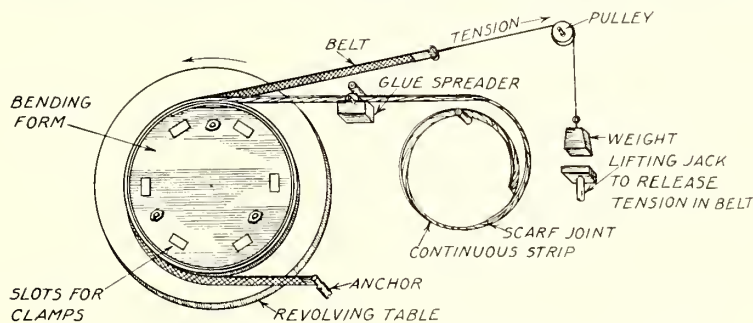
Method of gluing a laminated member in the form of a complete ring.
